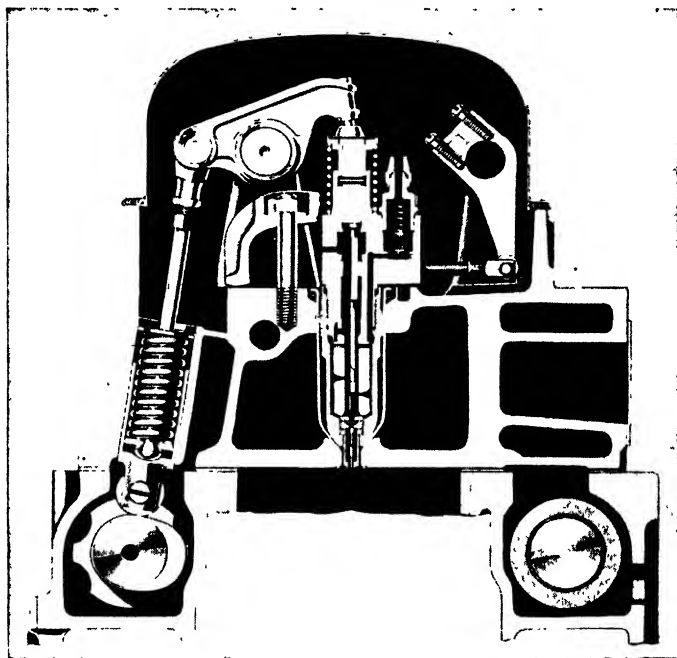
Fuel injection mounting. (*General Motors Corporation Engine.*)
